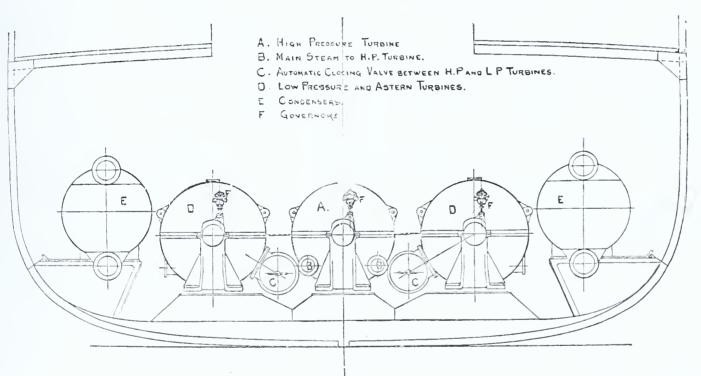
CROSS SECTION OF NEW TURBINE STEAMER, SHOWING END VIEW OF TURBINES.
